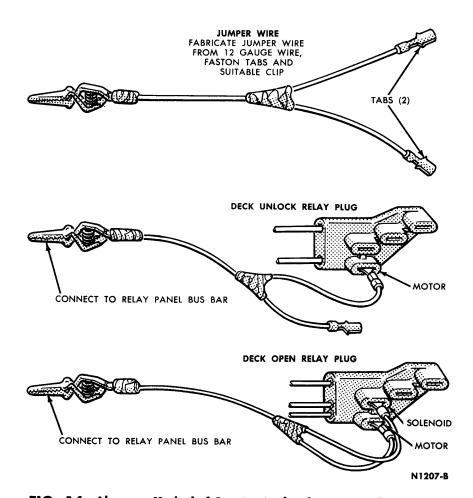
Alternate Method of Opening Deck Lid-Jumper Fabrication
